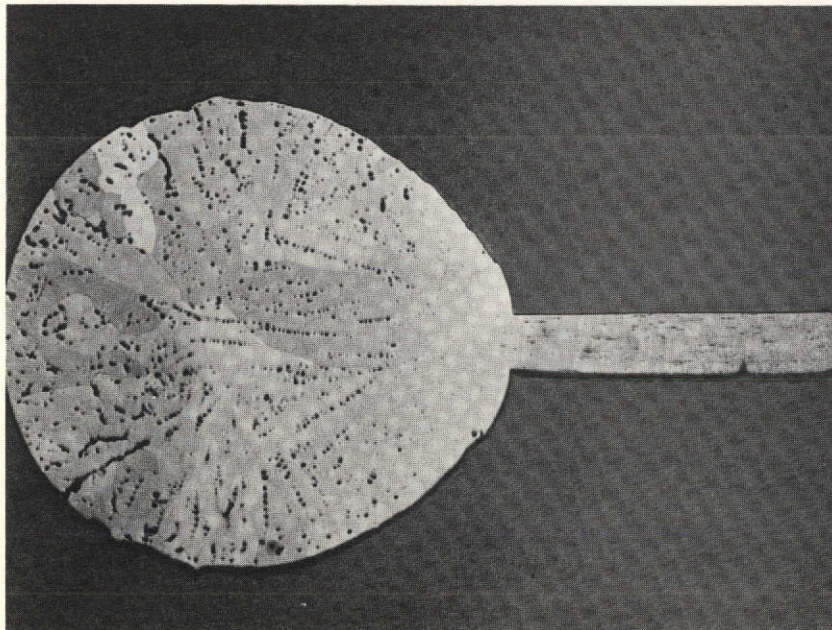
Etched Cross Section of Specimen SL-2.2
